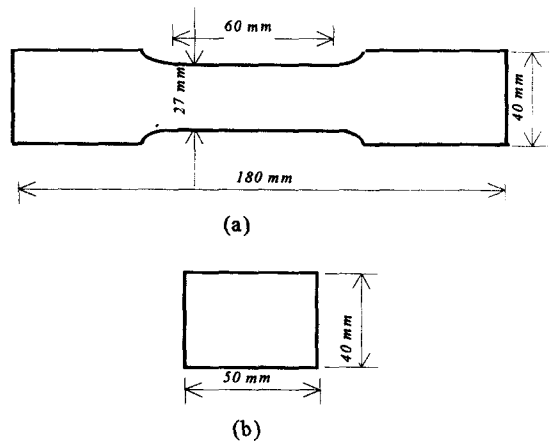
Tensile & Compressive Specimen of PMMA (a) Tensile Specimen(t=15), (b) Compressive Specimen(t=15)
